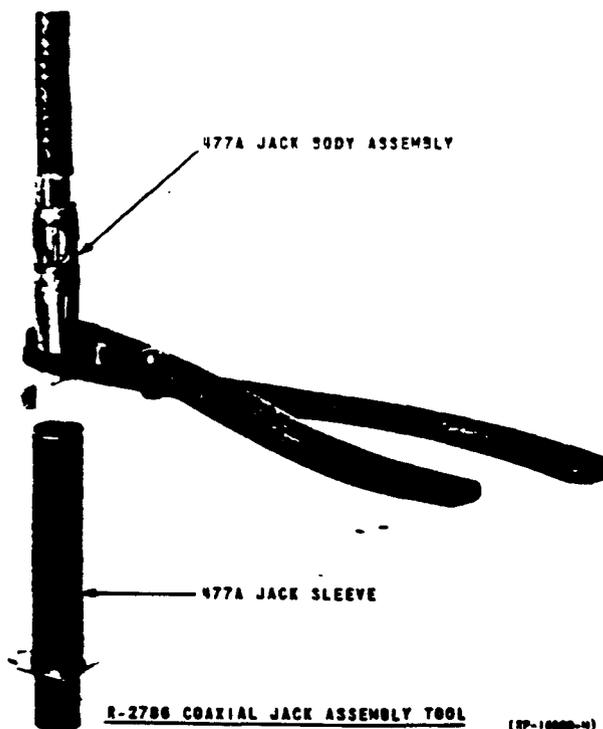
ASSEMBLY OF COAXIAL JACK (PAR. 4.612)
